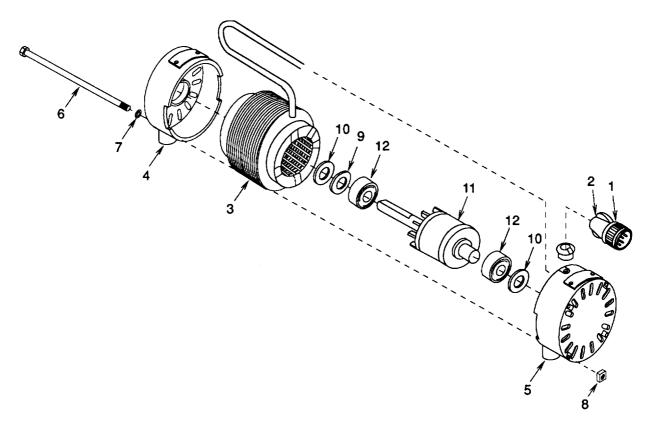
Condenser Fan Motor Assembly, Howell Electric Motor Division of SFM Corp., Single Phase Motor, Model 70N4-4886.
